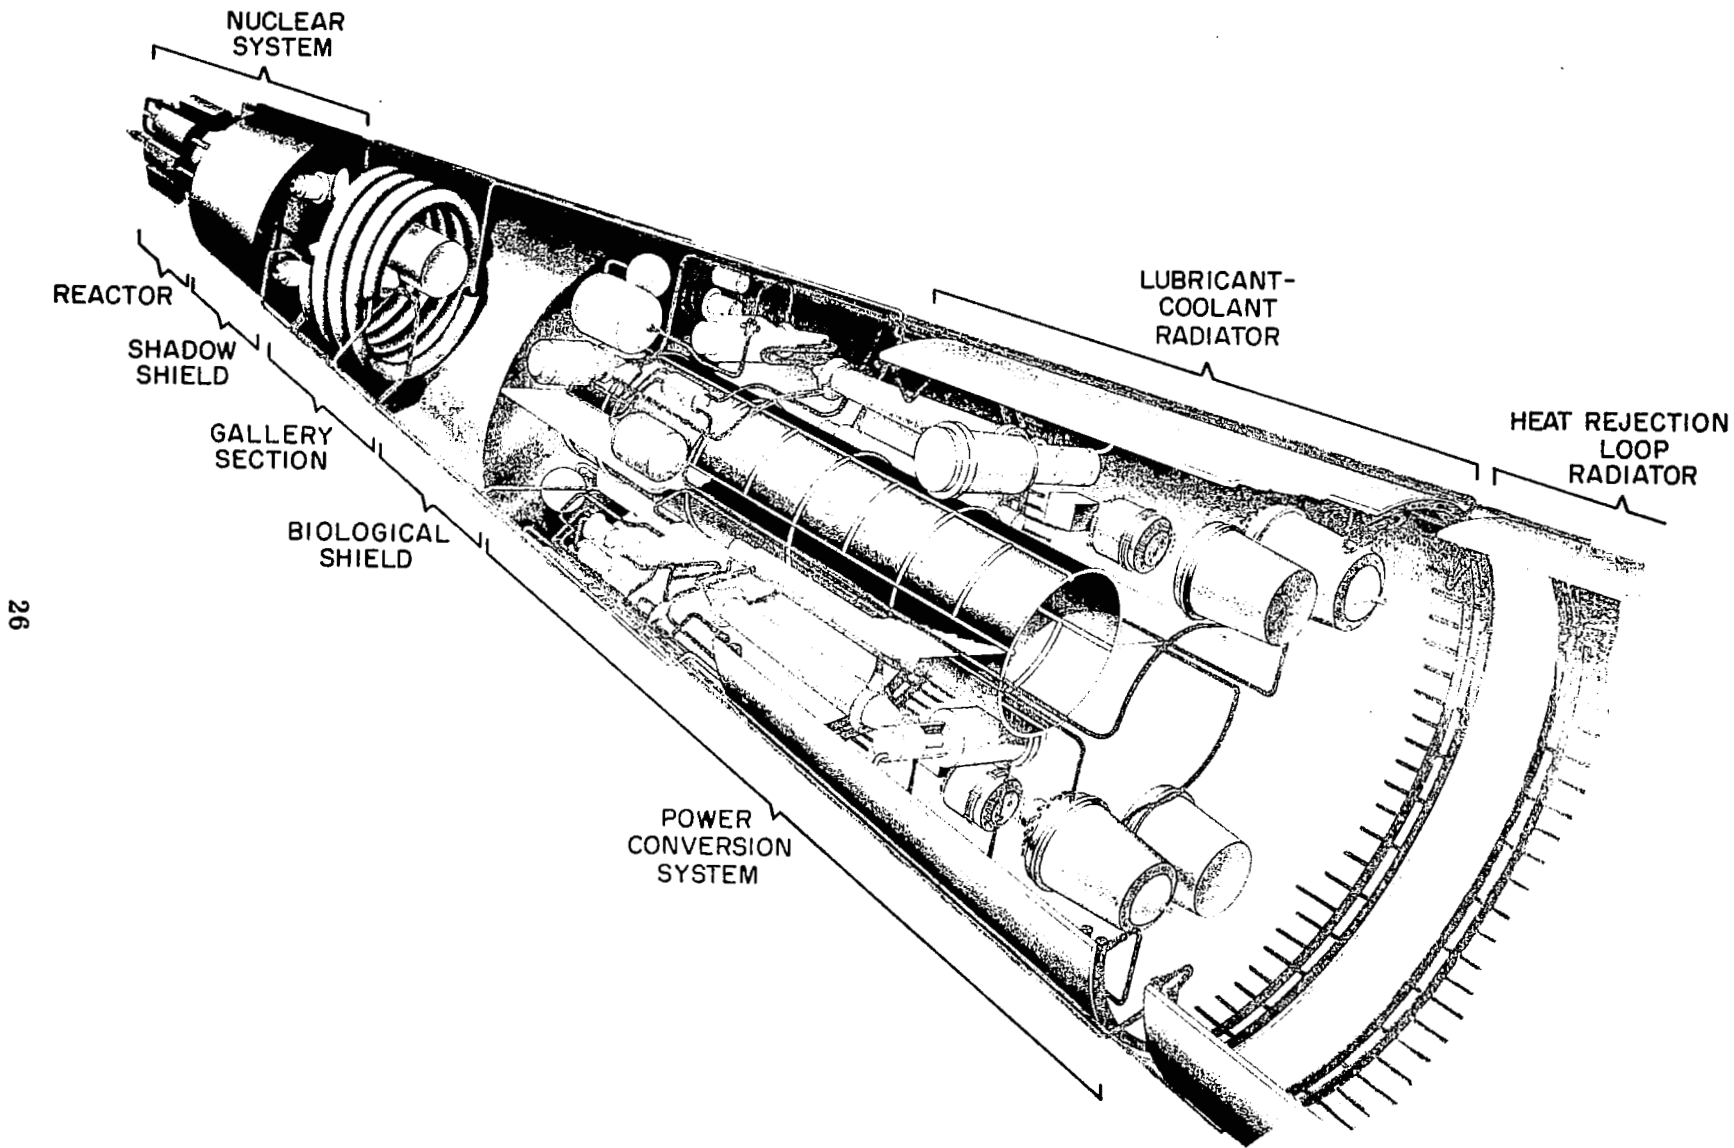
90 kWe System Electrical Component Assembly Arrangement
